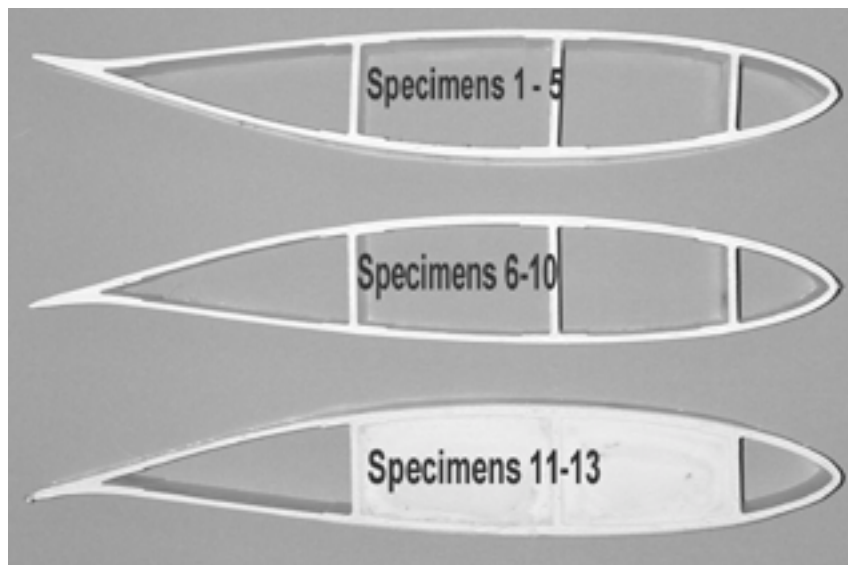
Photo of PS Enterprises’ Pultruded Cross Sections in Three Test Configurations
